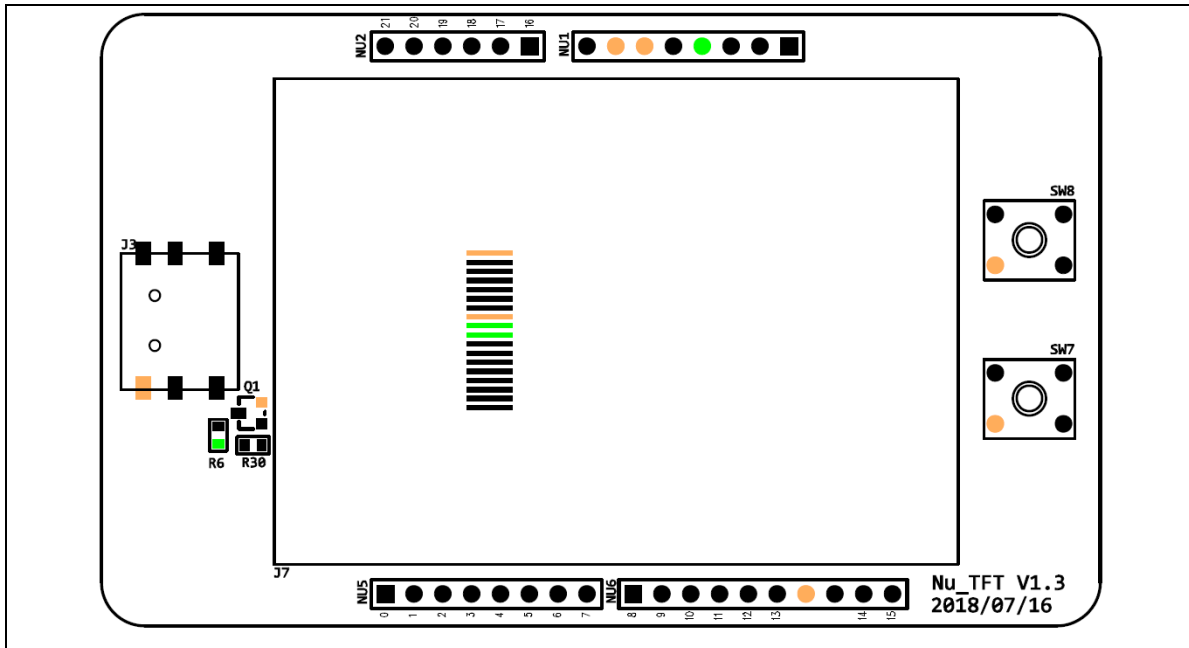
NuTFT-SPI_320x240 Daughter Board Placement - Front View
